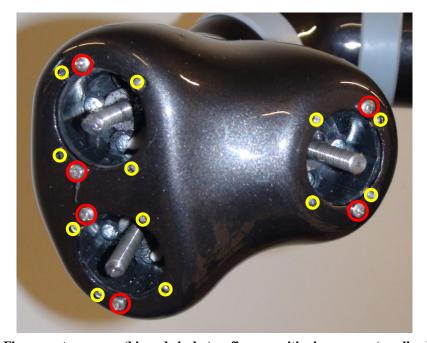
Finger motor screws (big red circles) vs finger positioning screws (small yellow circles)
